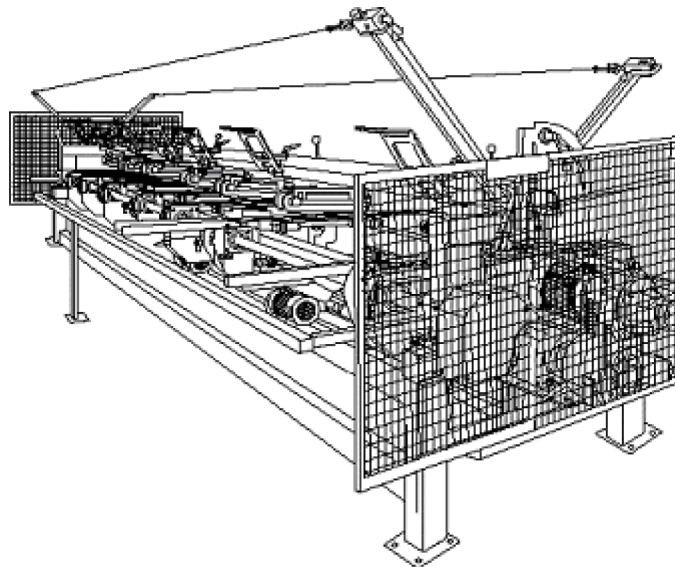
Example of multi-blade cross-cut sawing machine with integrated feed of the work-piece and manual loading and/or unloading (guards are partially not represented for clarity)
